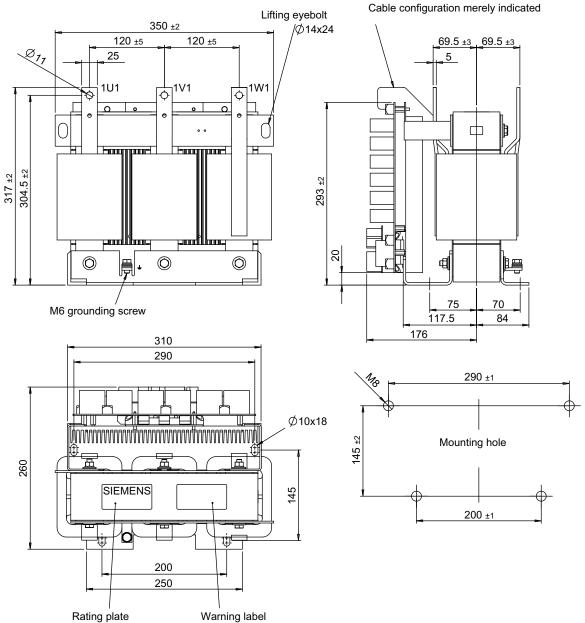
Dimension drawing of dv/dt filter compact plus Voltage Peak Limiter, type 2
